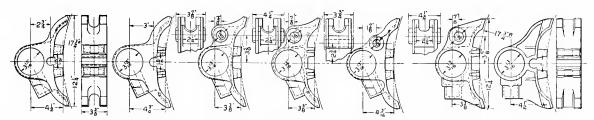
Creco Standard Automatic Adjustable Brake Heads. Chicago Railway Equipment Company.
